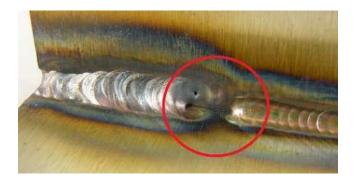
Poor quality of the raw material due to pore inside the weld
